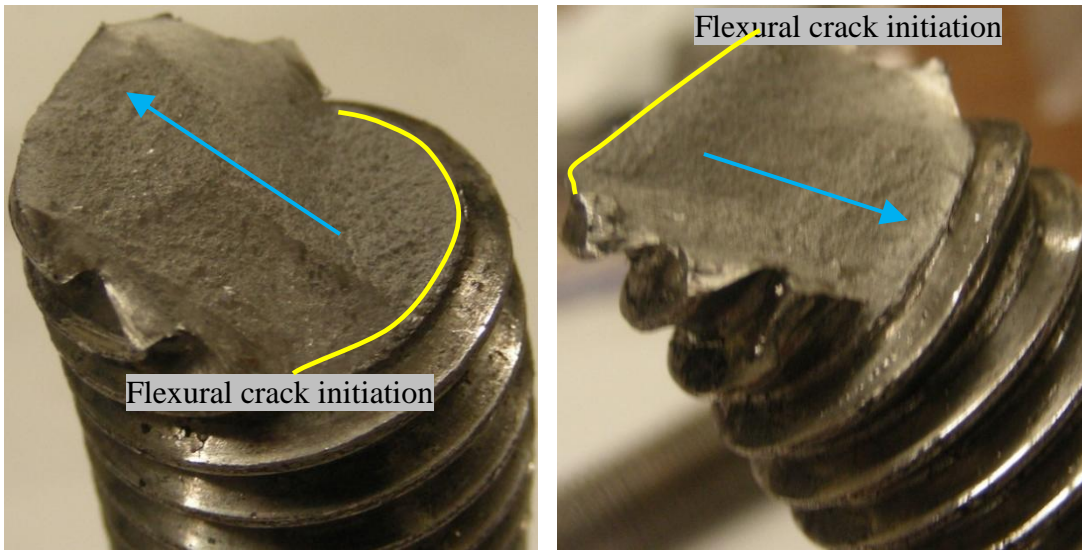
fracture surfaces of A304-4da-MD
